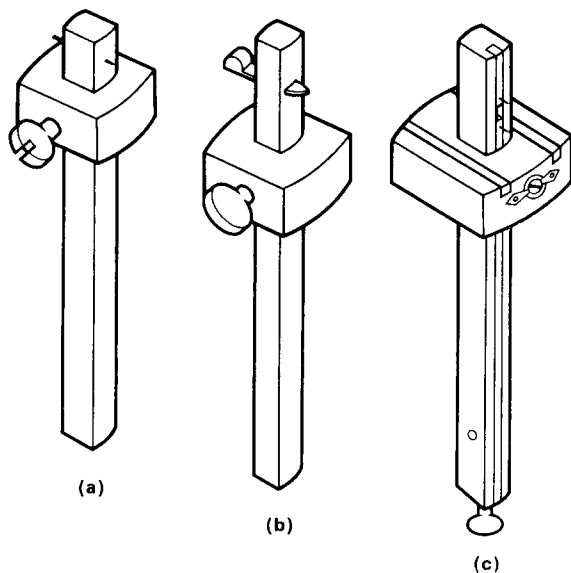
(a) Marking gauge with single pin and adjustable stock. (b) Cutting gauge with a cutting blade held by a brass wedge. (c) Mortise gauge with two adjustable pins.
